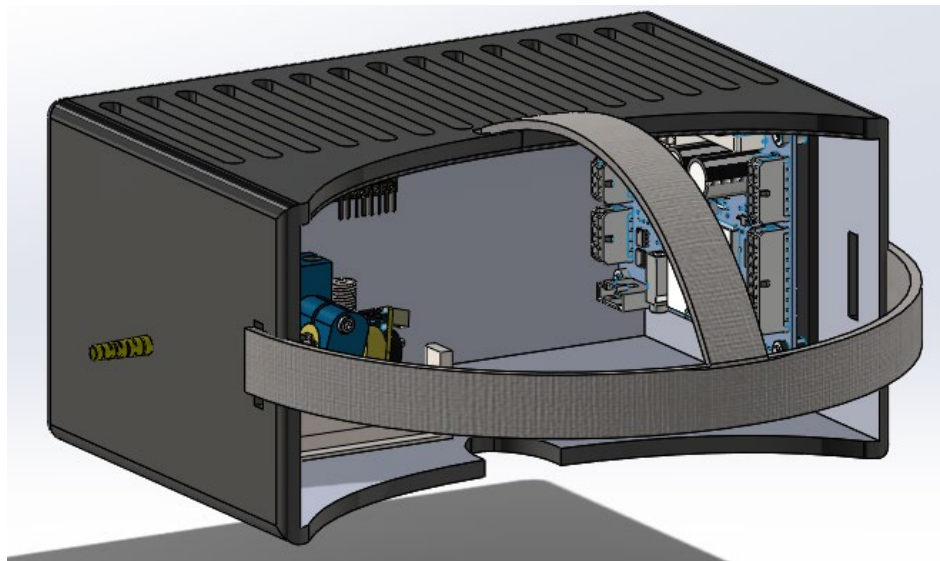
SolidWorks Rendering of Prototype Assembly (back view of galvanometer driver)
